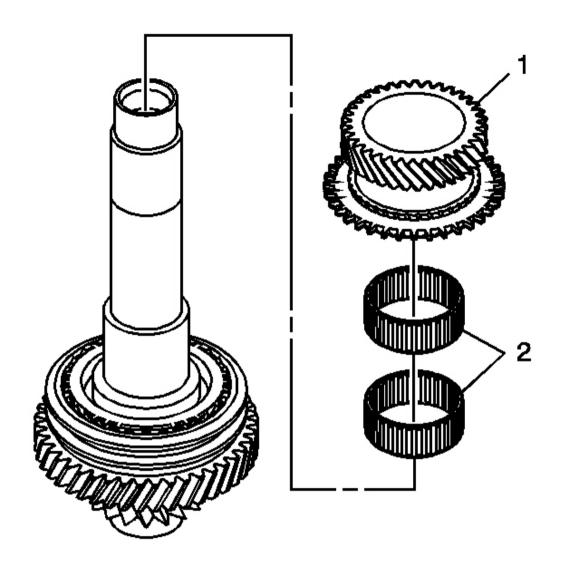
View Of 5th Gear & Caged Needle Bearings Courtesy of GENERAL MOTORS CORP.
